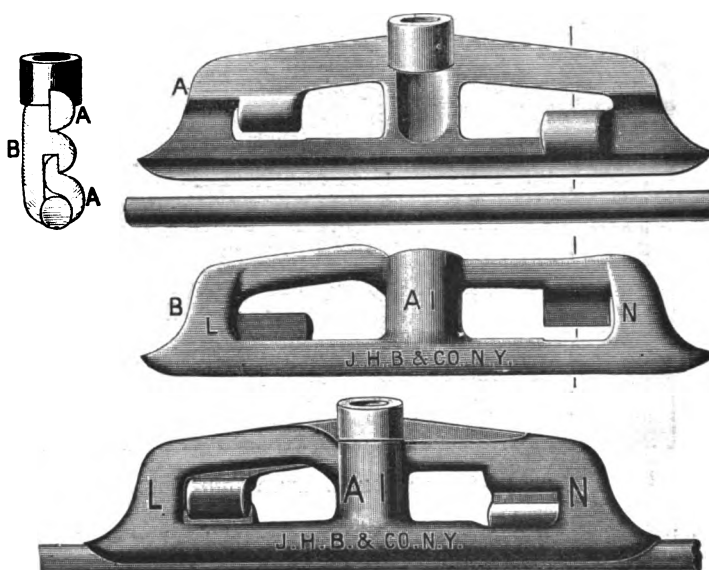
LAIN'S IMPROVED MECHANICAL CLAMP.
